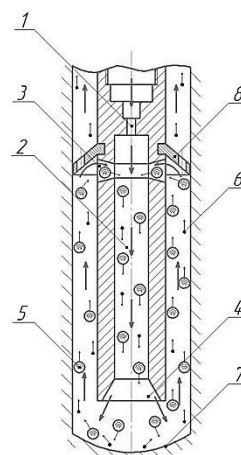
Ejector pellet impact tool string and its operational principle [2]
